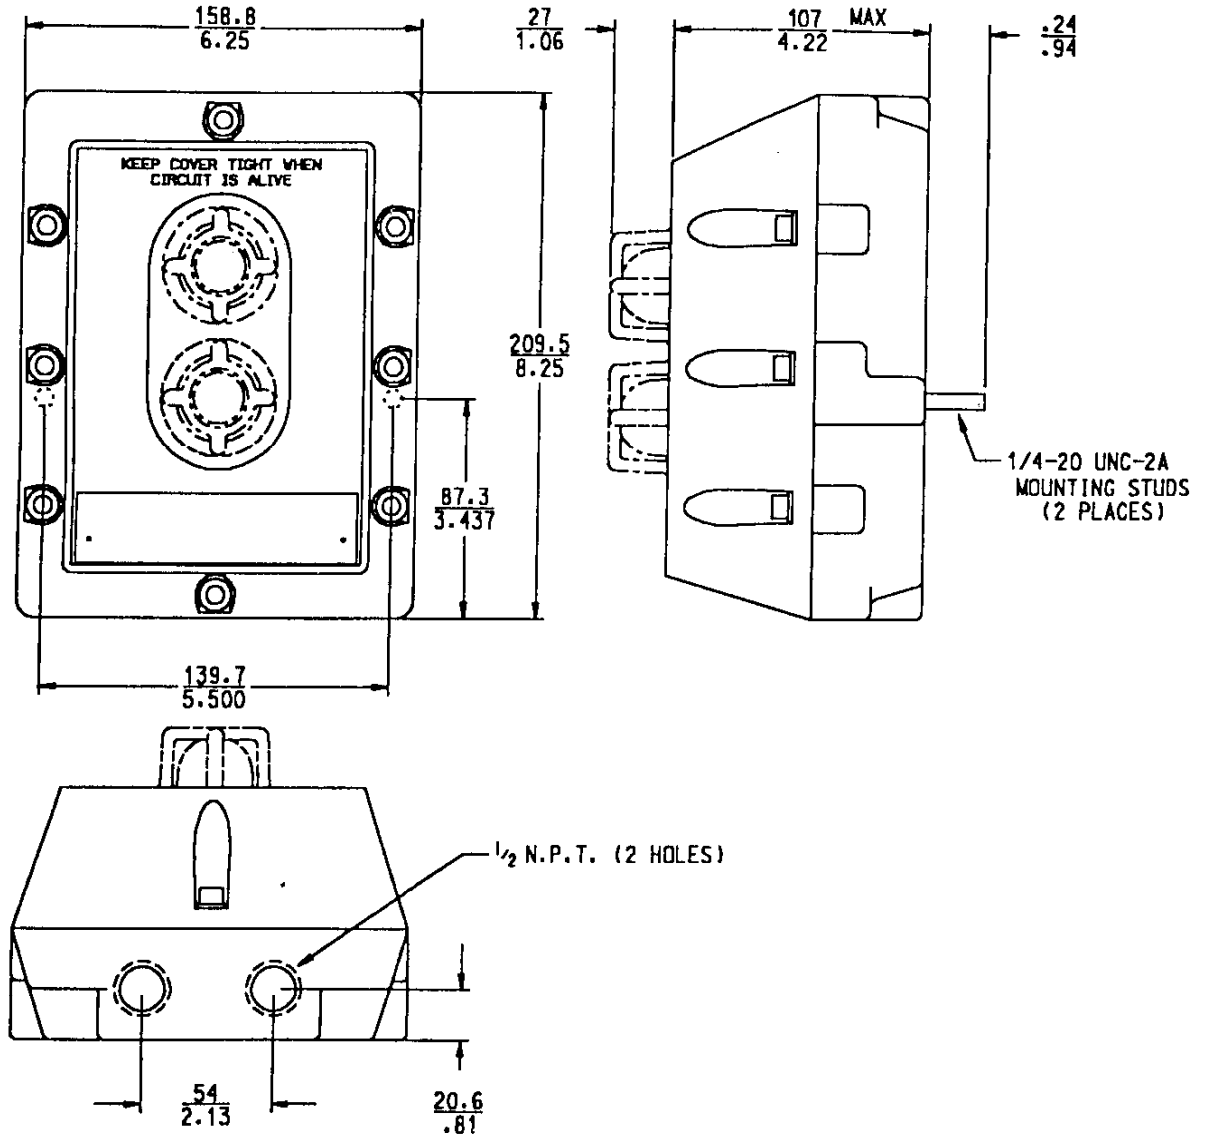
Dimensions, Explosion-Proof (Cl. I, Div. 1, Gr. C & D, Cl. II, Div. 1, Gr. E, F & G)
